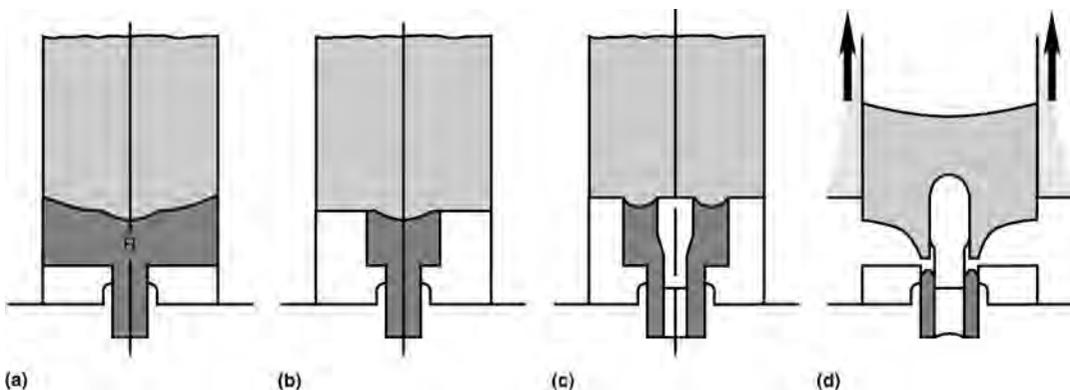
Extrusion of aluminum “billet on billet.” (a) Extrusion of a billet on the discard *R* in the container. (b) With feeder die. (c) In the ports of a porthole die. (d) Pulling off the discard in a bridge die to avoid transverse welds [Ake 92]
